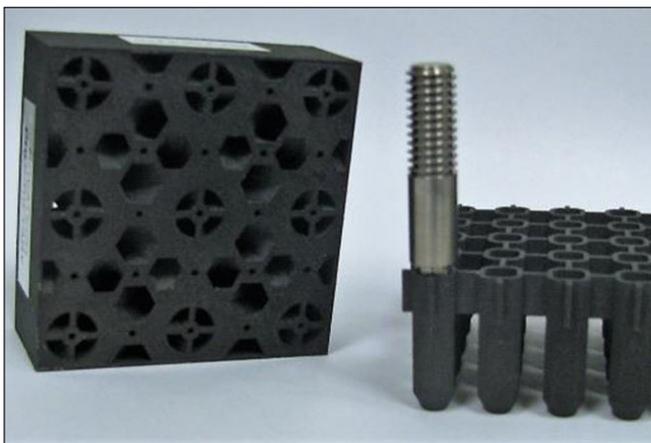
Prototype 5X5 Bottom Nozzle Grillage Arrays
